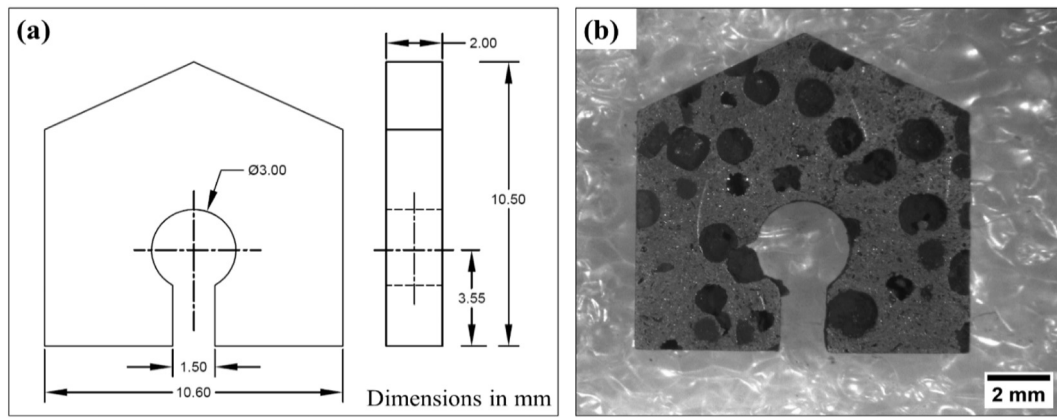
(a) CAD drawing of the microboat showing its dimensions in mm (b) An optical image of a microboat machined from the AZ61 hybrid foam sample.
